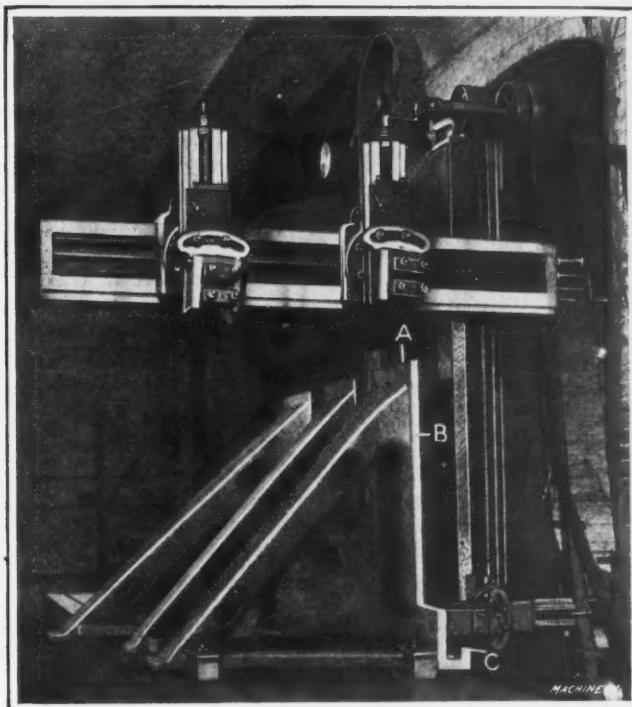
Open-side Planer used for completely planing the Column Bearing in Open-side Planer Knees
